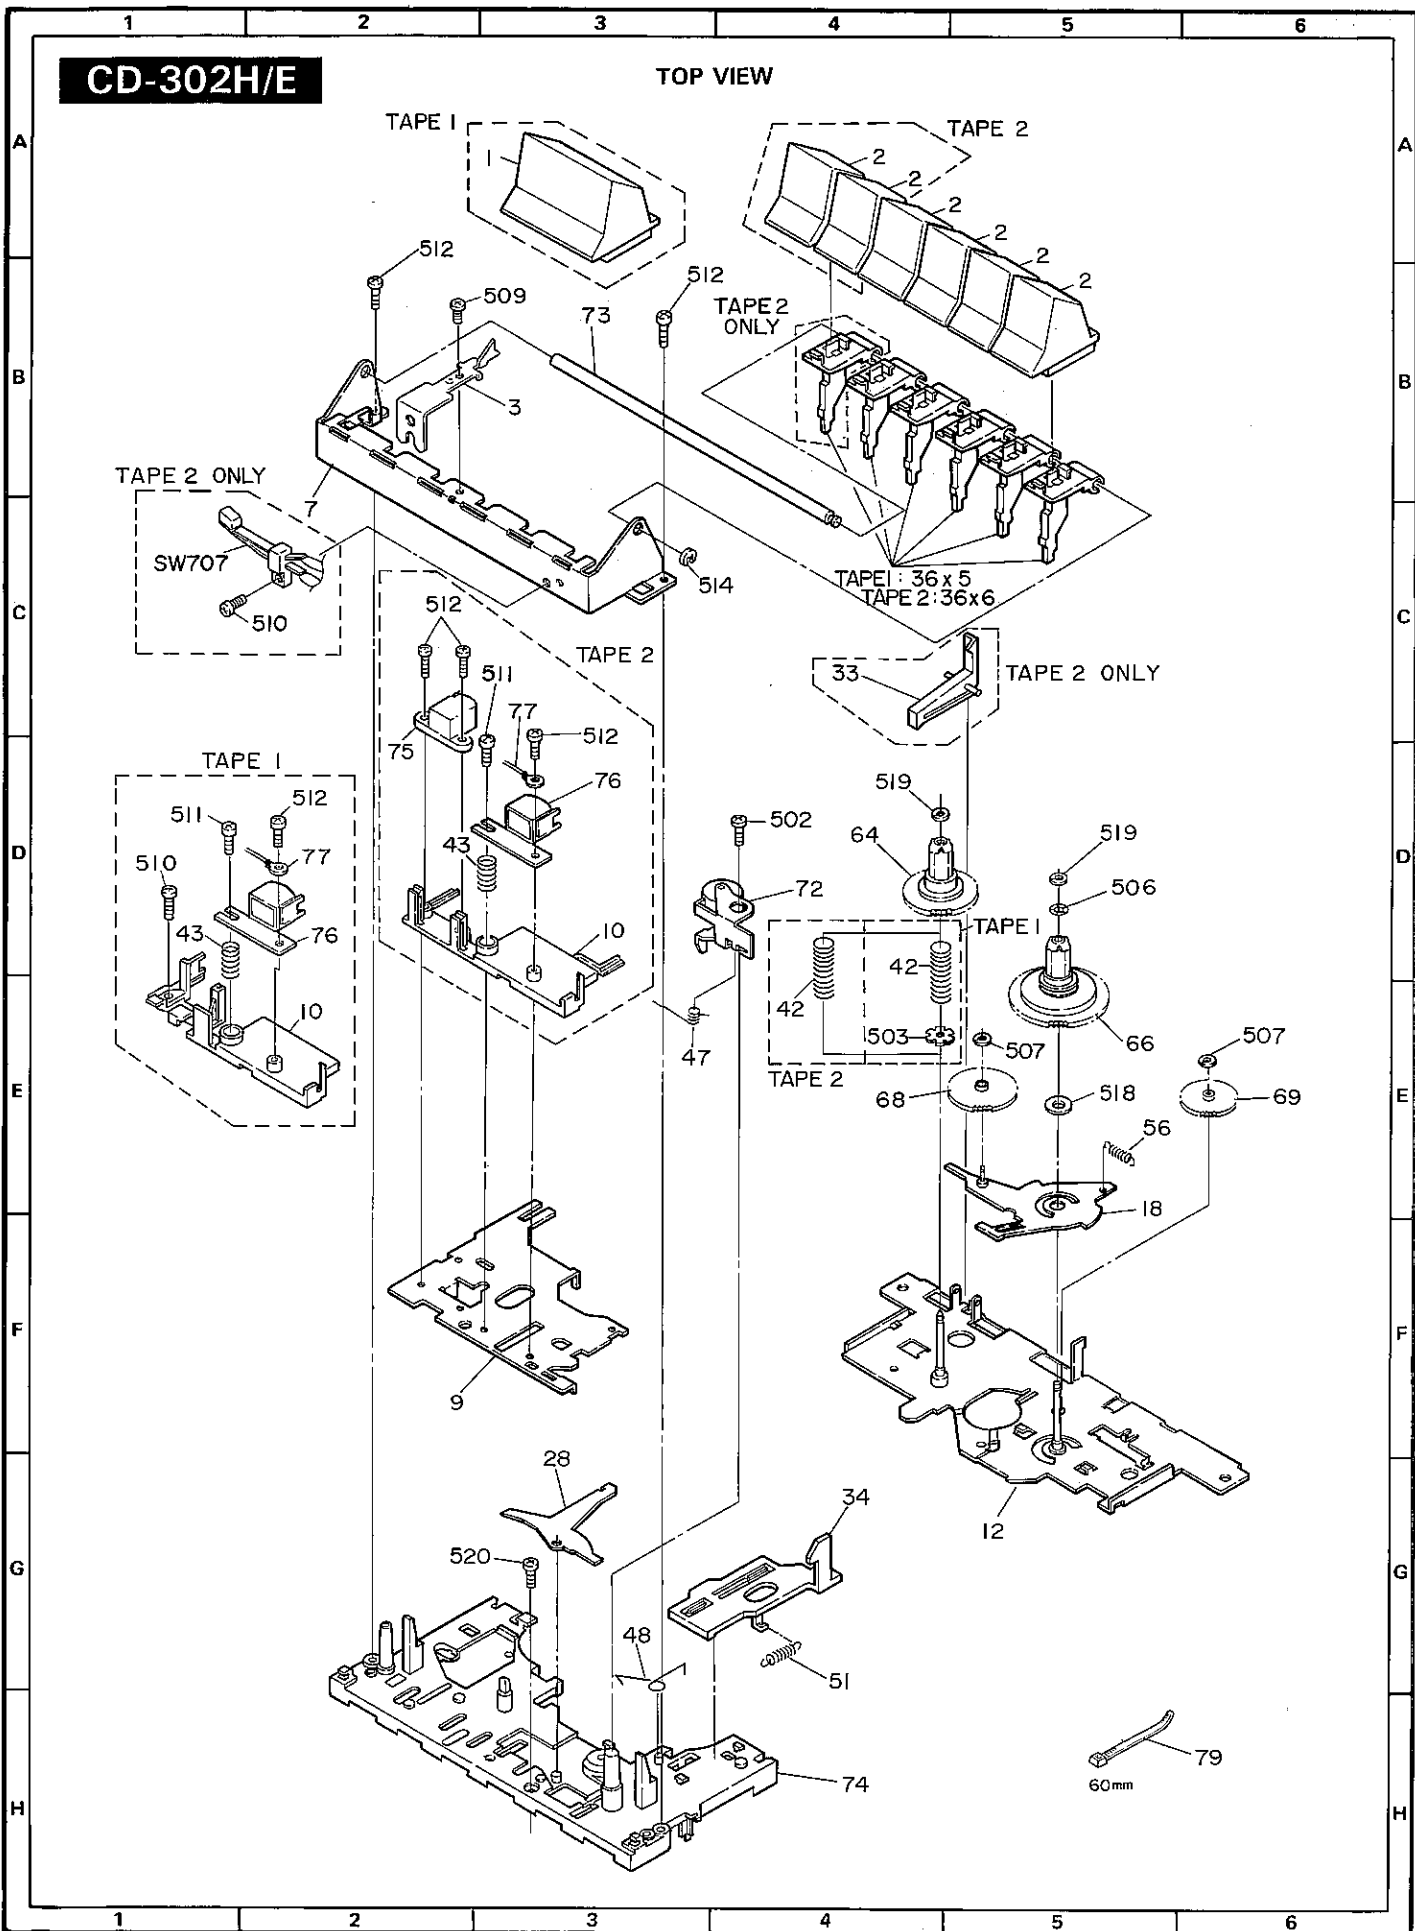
TAPE MECHANISM EXPLODED VIEW (1/2)
